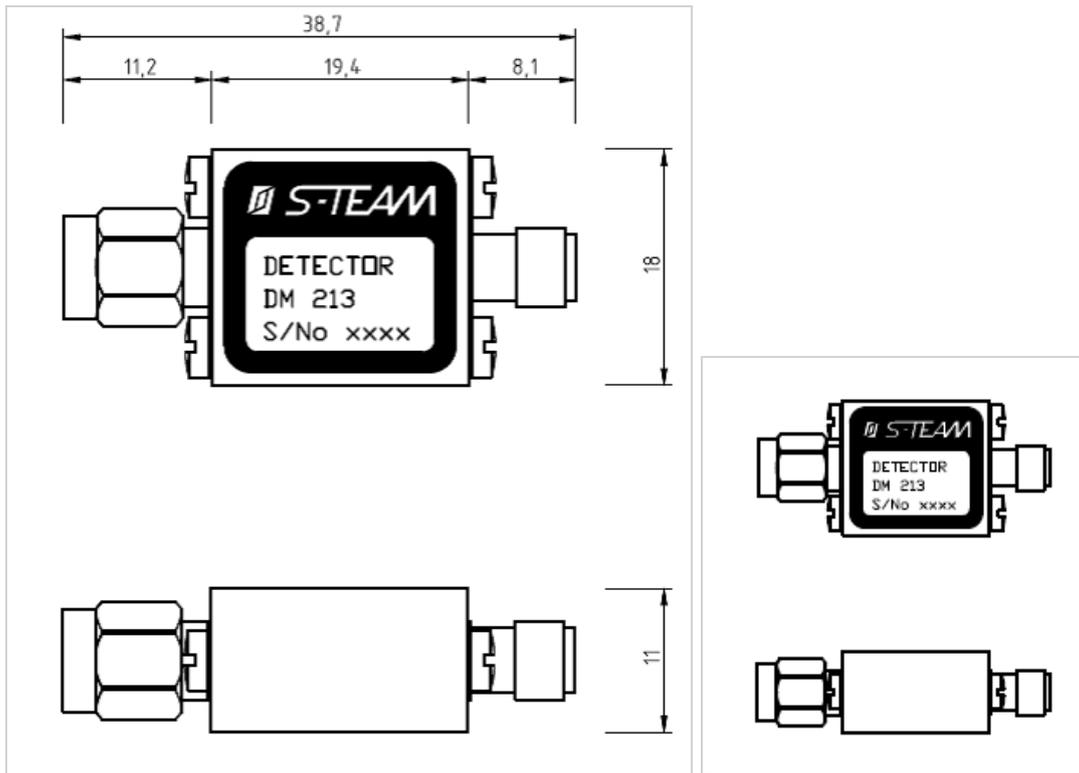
Basic DM313 dimensions in millimeters (the dimensions are the same as for the DM213 shown). Right: Actual size.
